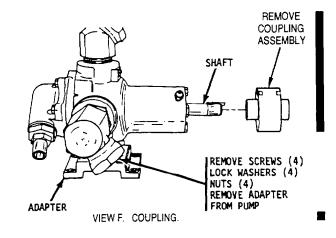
Fuel transfer pump and auxiliary hydraulic motor assembly-remoual and installation.
